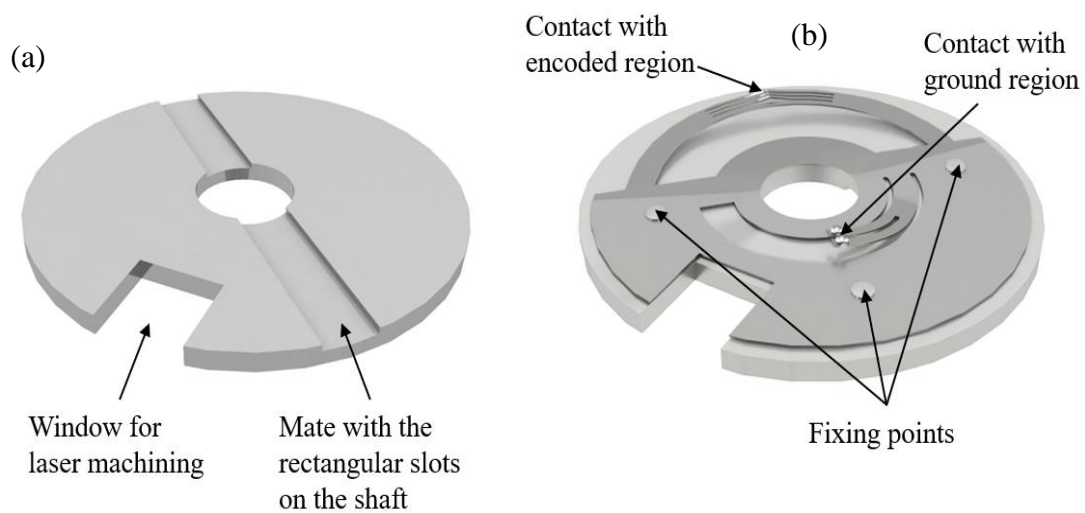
(a) the top view of pin holder and (b) bottom view of the pin holder assembled with the pin. The three small cylinders on the pin holder are used to locate and weld the pin.
